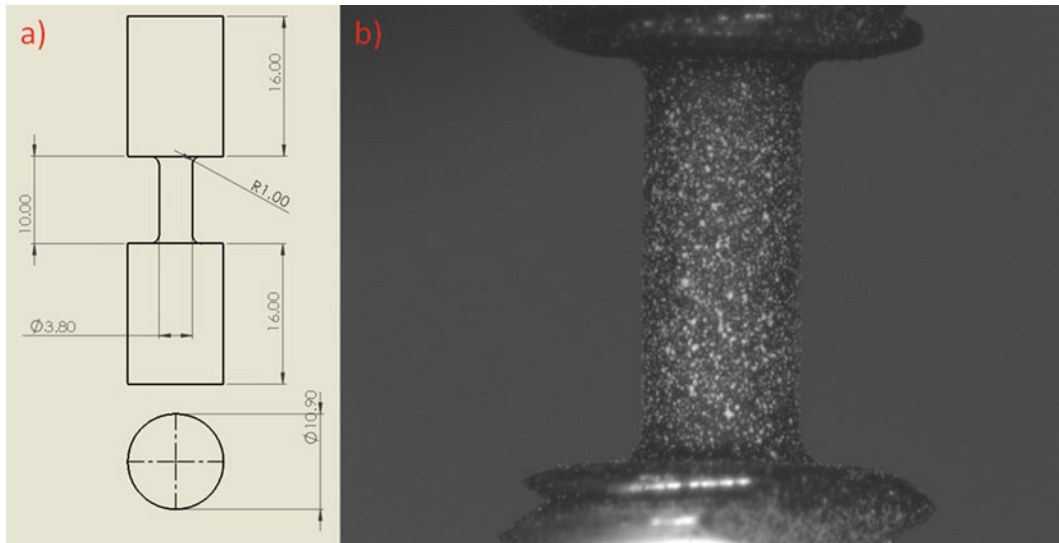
(a) The dimensions of the cylindrical specimen are in millimeters; (b) the speckled pattern on the specimen surface
